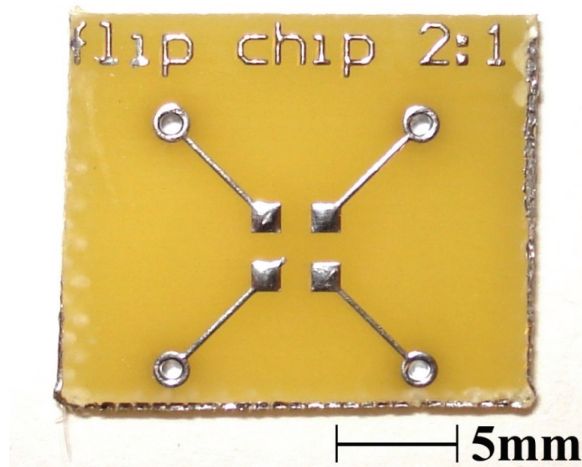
A PCB used to determine appropriate flip-chip bonding techniques for the single-piezoresistor sensor pads.
